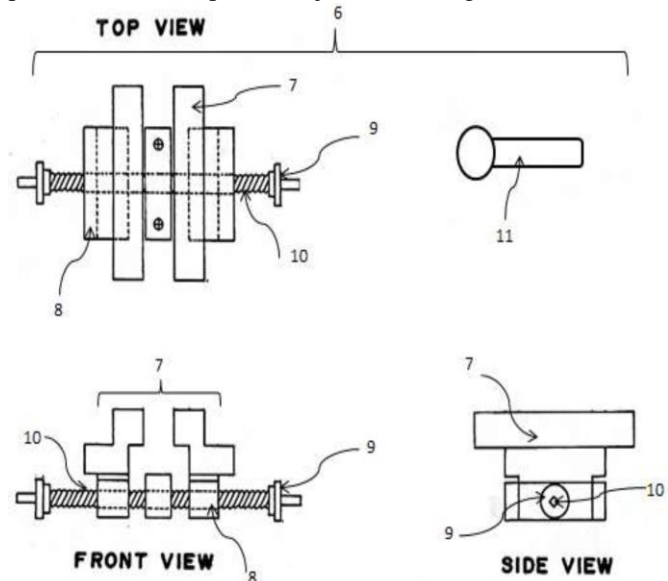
Detailed top view, front view and side view of the clamping-holding assembly of the present invention.
